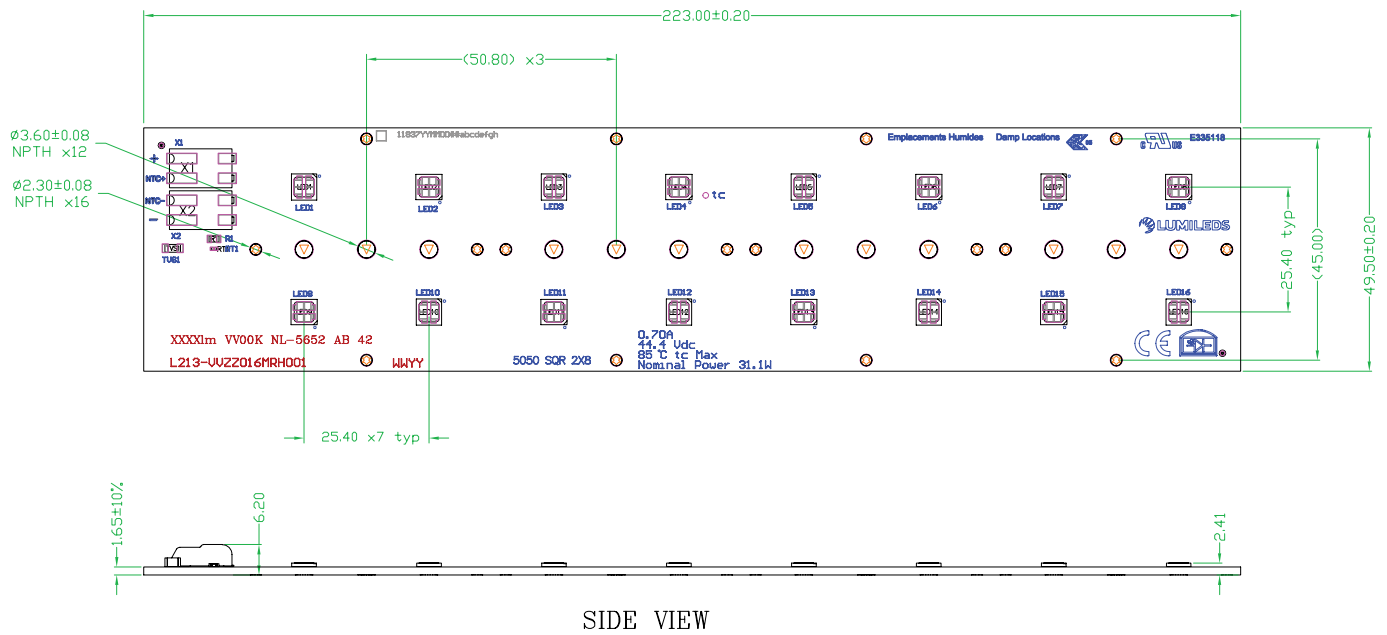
Mechanical dimensions for L213-xxxx016MRH001.
